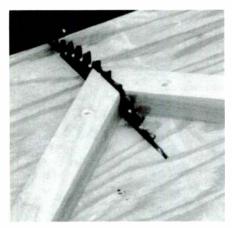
Cutting the slot in the jig. Note that the top of the saw blade has just passed the apex of the guide.
